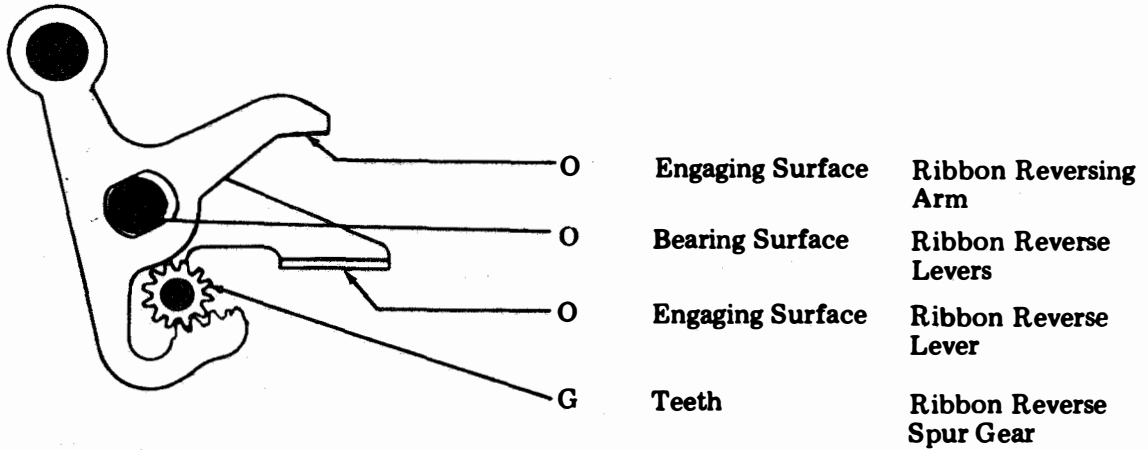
Ribbon-Feed Mechanism, Right Side View
